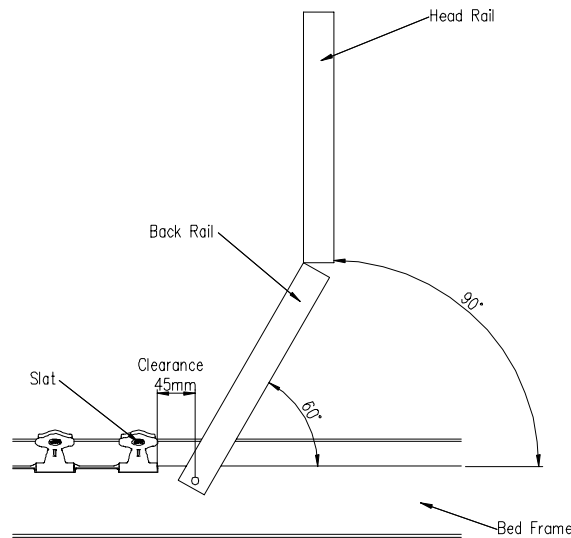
The modified back mechanism with reduced angle and clearance requirements
